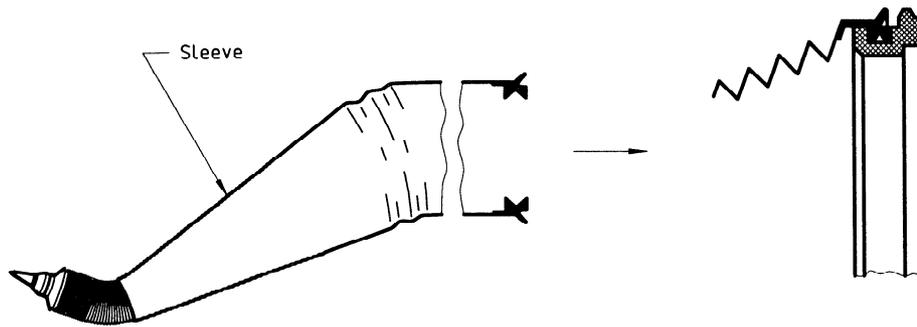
Detail of lip seal and support ring for a manipulator gaiter
